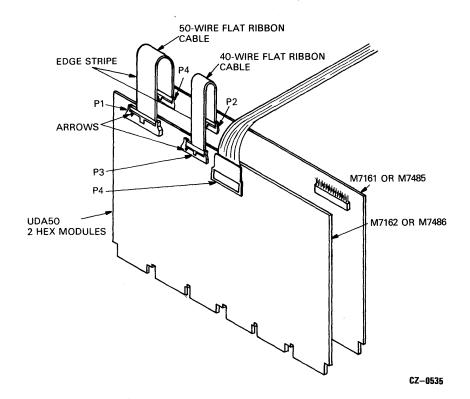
UDA50 Intermodule Flat Ribbon Cables
